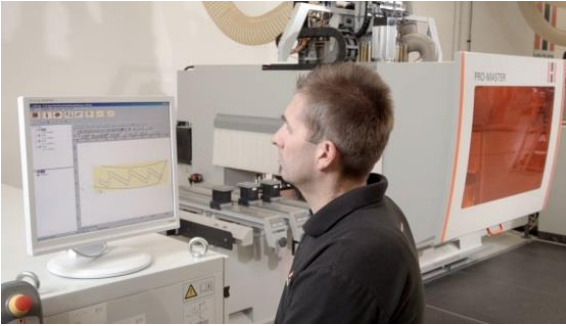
The process of drawing the furniture component that will be manufactured on the computer [5]
